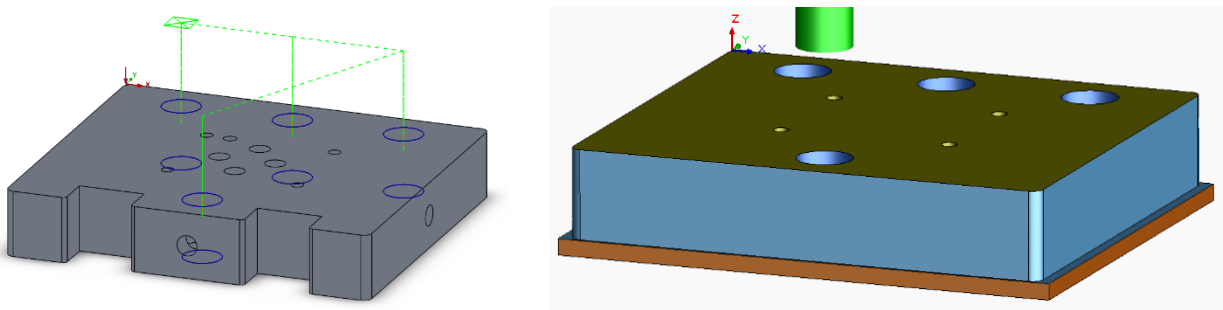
Drilling and tapping 1/4 – npt holes (a) tool path (b) machined result
